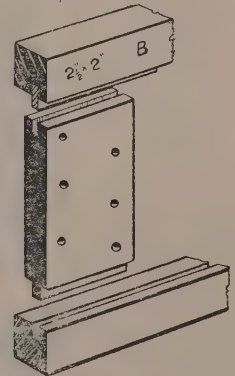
SLIDING ARRANGEMENT OF PEG BOARD.
